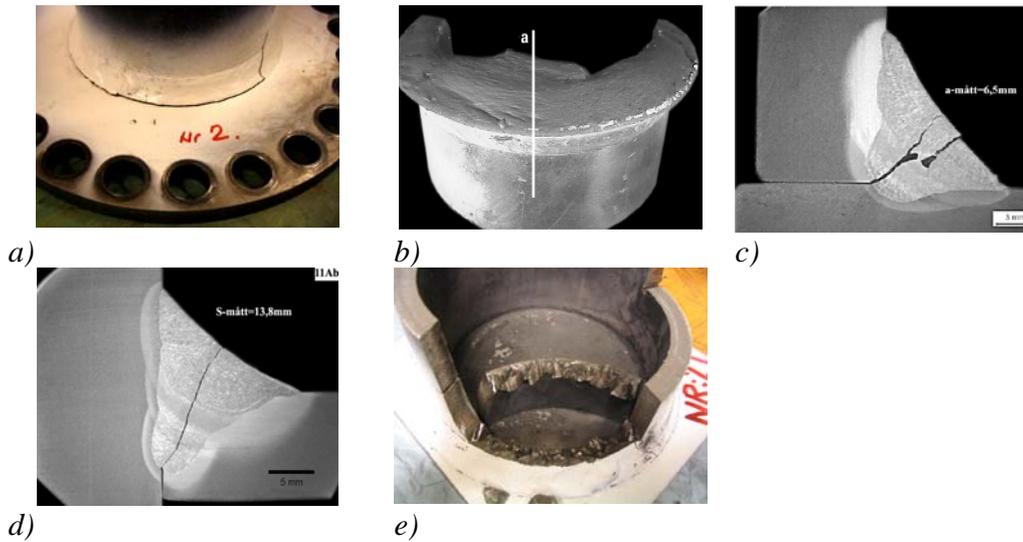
Fatigue crack paths for tubular joint structures: a) and b) batch B1 toe cracking; c) batch B4 – root cracking; d) batch B2 and B3 – root cracking; e) batch B5 (stress relieved) – weld toe
